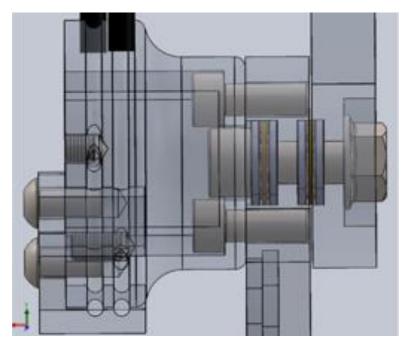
First idea for allowing the movement of the joints was created by using two ball thrust bearings. This figure shows also the set screws for locking the wires.
